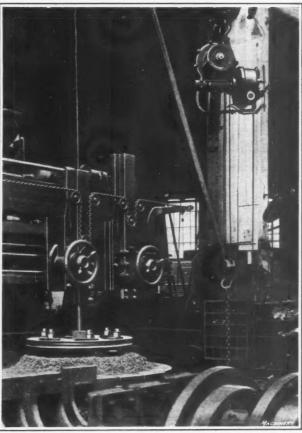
An "Imperial" pneumatic motor hoist built by Ingersoll Rand Co., New York City, is used to assist the operator in setting up heavy work on a turret lathe and to remove completed work from machine. Having an individual hoist for a machine avoids loss of time by the operator and machine in waiting for assistance
